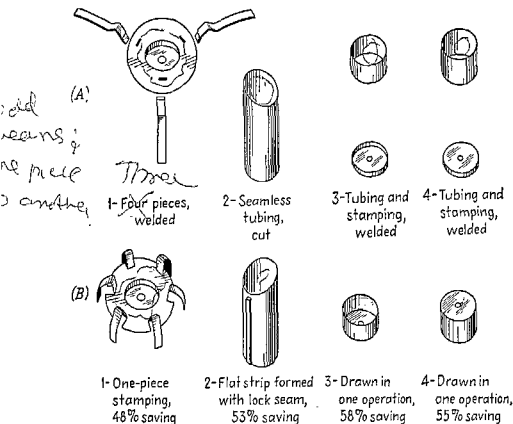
Components of television-tube electron gun: (A) original design; (B) redesign. (John Volkert Metal Stampings, Inc.)
